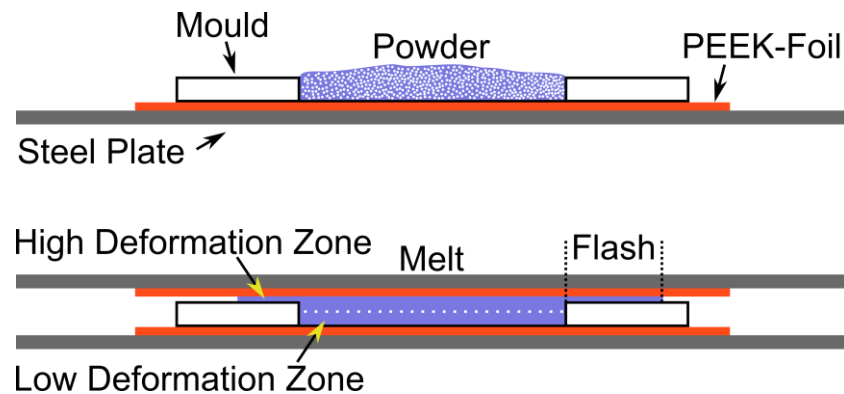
Schematic illustration of the compression moulding with the flat moulds with hole-cavities.
